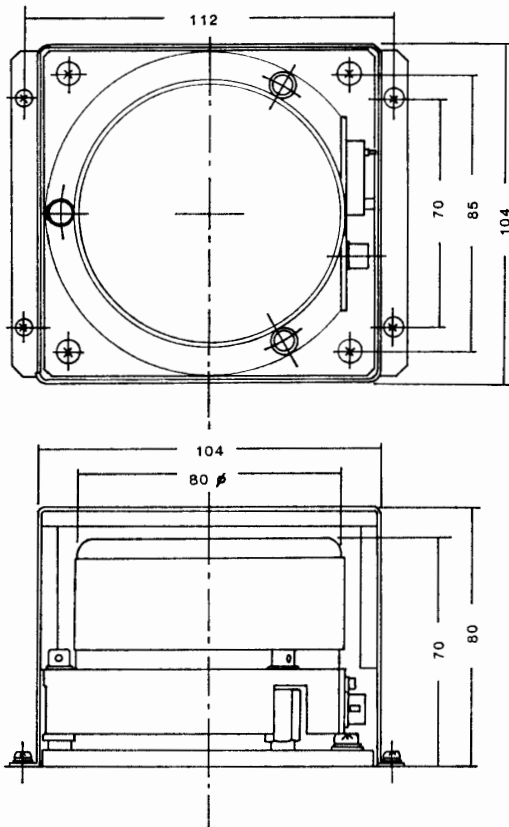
Housing of the gravity sensor with double casings. The inner case is hermetically sealed.
